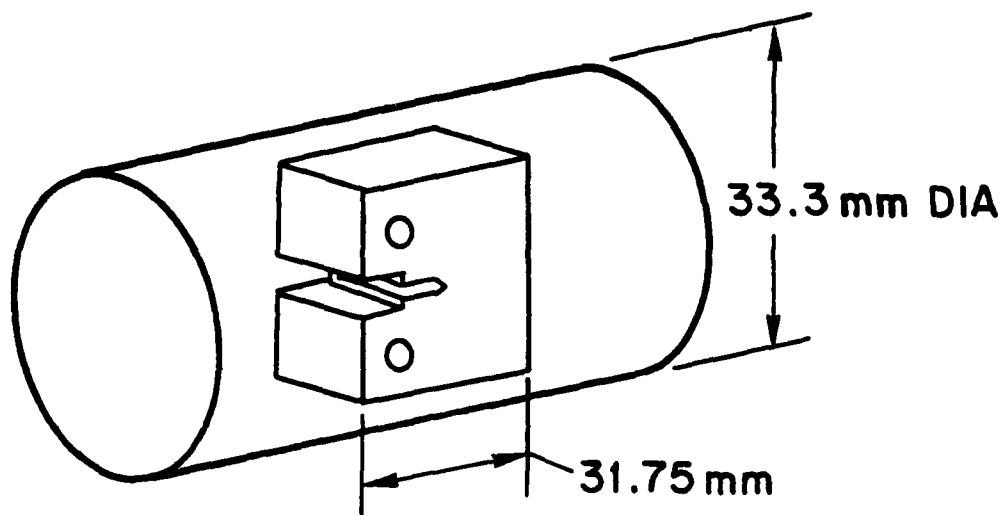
Specimen orientation in test stock (33-mm rod).
